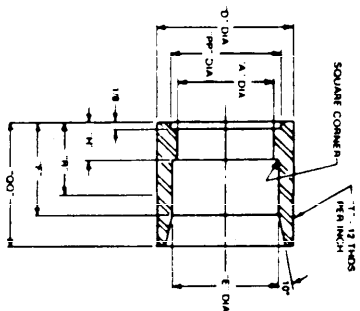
B24. Stuffing tube for steel and aluminum bulkheads (surface ships).
